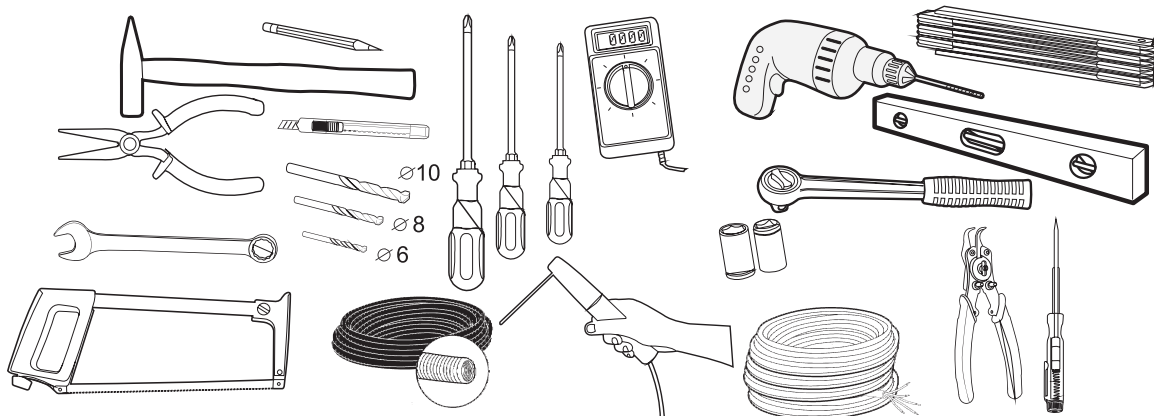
Materials and tools indispensable for the assembly of the gate.
